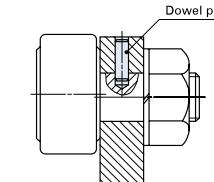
Mounting example of Solid Eccentric Stud Type Cam Follower
